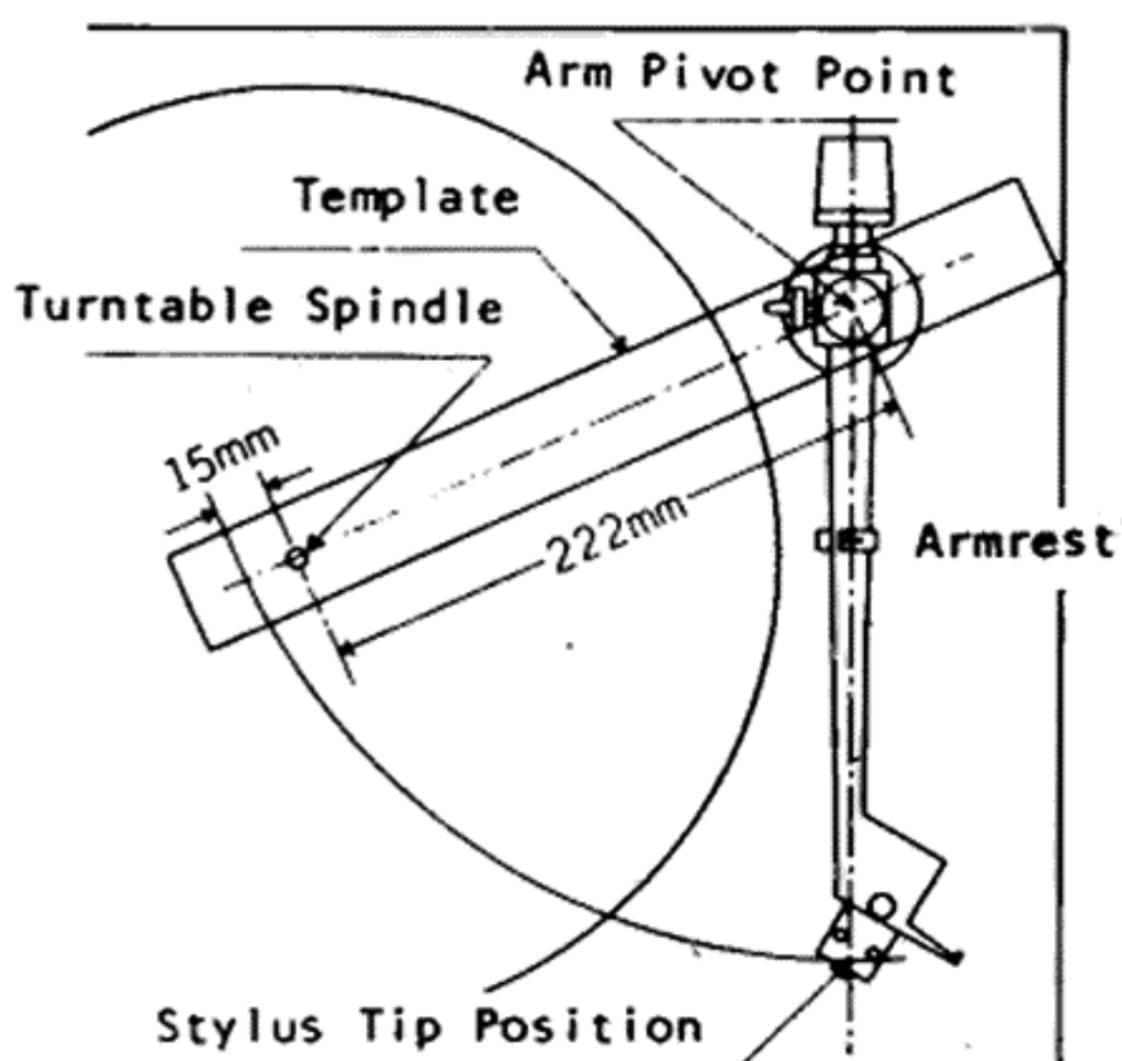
shows the dimensions of an assembled Grace G-707 MkII.
